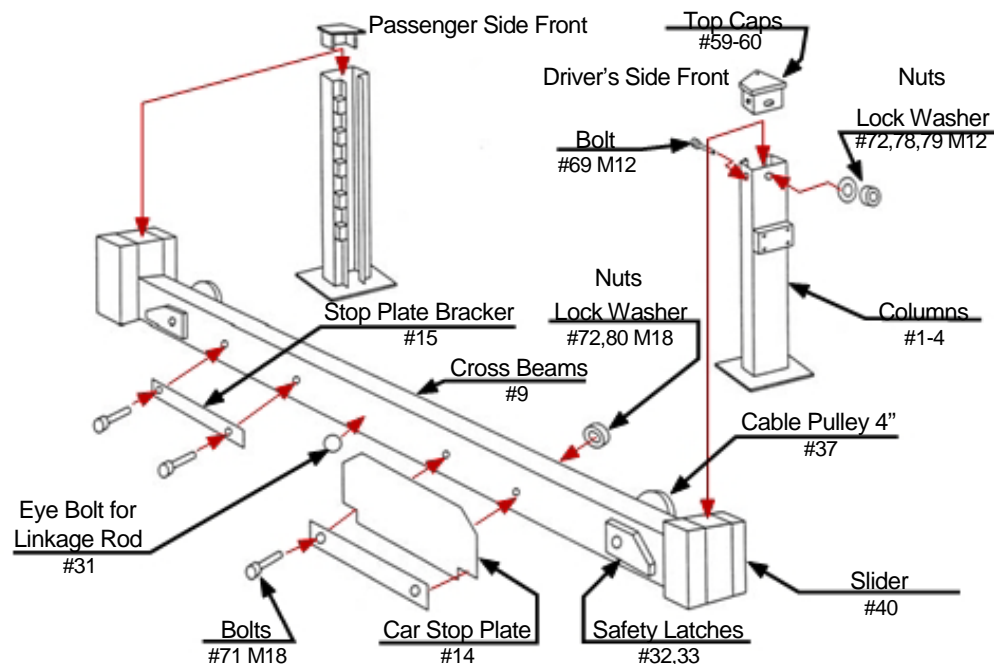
(Front Side Post & Cross Rail Assembly)
